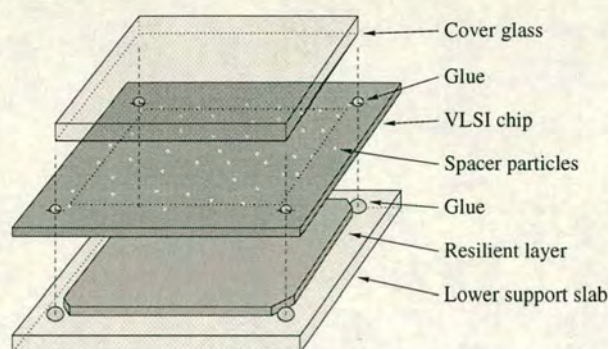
The required component stack for assembling an SLM using the compliant back spacer and compression assembly scheme.
